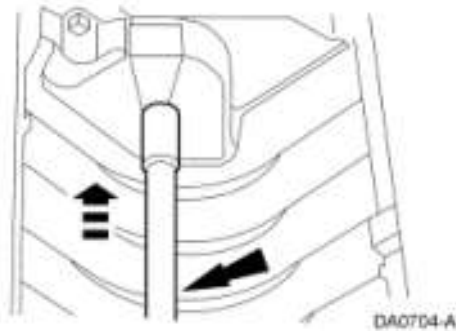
Sliding Coolant Tube Forward With O-Ring Seals Into Cylinder Block
